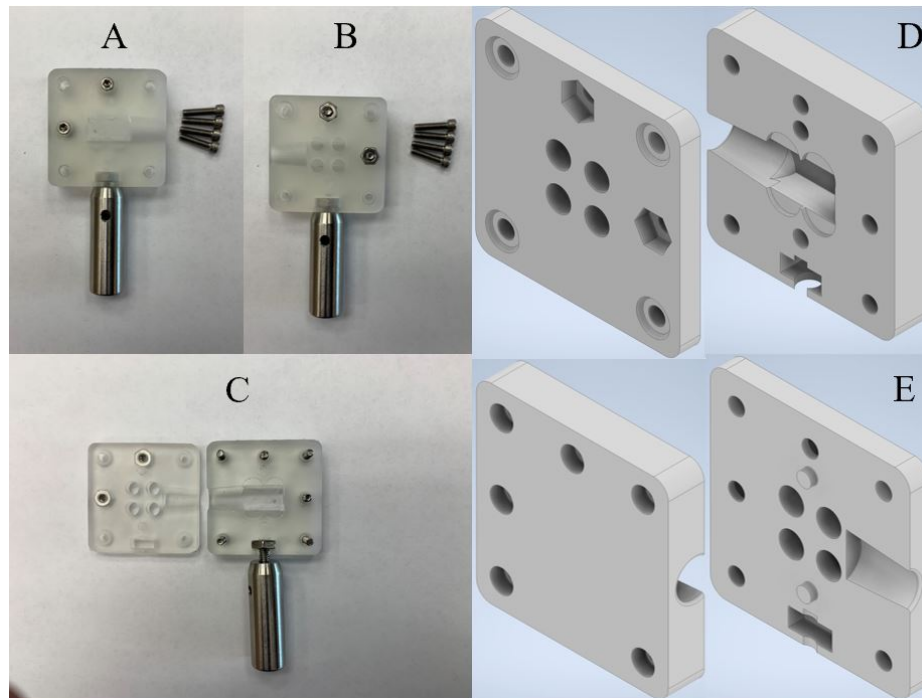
Rendering of the CAD model (D and E), and the 3D printed housing for the LEDs (A, B, and C). Image A shows the back side, and image B shows the front side, of the assembled housing. Image C shows the housing disassembled with the inside portion of both sides facing upwards. Image D shows a CAD model of the housing disassembled from the front view. Image E shows a CAD model of the housing from the back view. The holes in the middle of the front face are where the LEDs will extend outwards. The cavity behind the LEDs allows for soldering space. This cavity uncovers just over half of the base of the LED leaving enough material to clamp the LED in place when the two halves are mated. The four screws shown in images A and B extend through the holes in each corner and screw into the cage rods. This secures the end of the cage rod to the housing.
